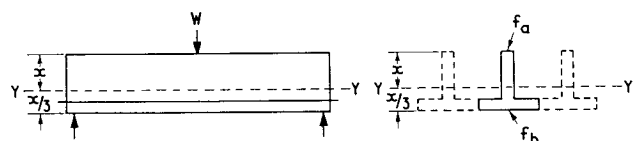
NORMAL LOADING OF TYPICAL CAST BEAM
